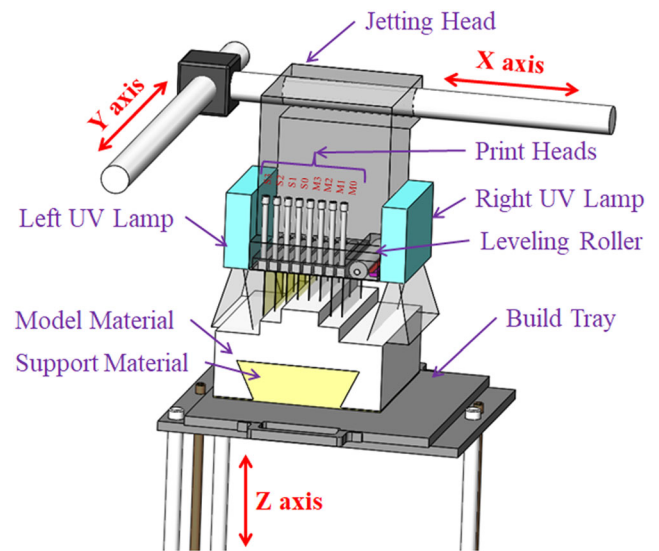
A schematic illustration of the PolyJet 3D printing mechanism
